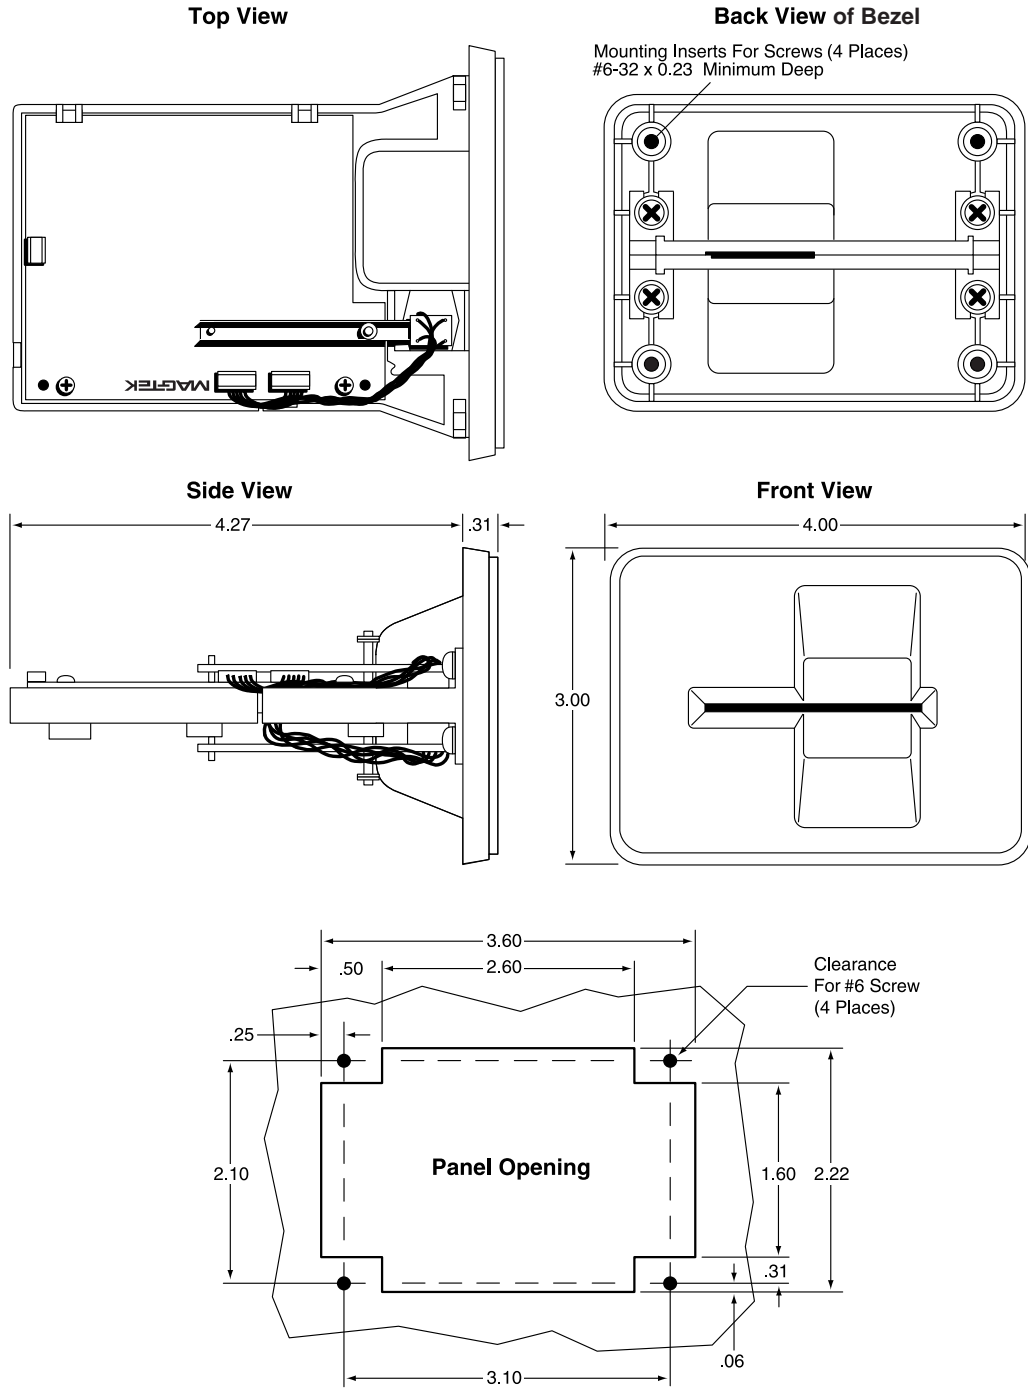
MagTek Flat-Faced Bezel Mounting Dimensions
